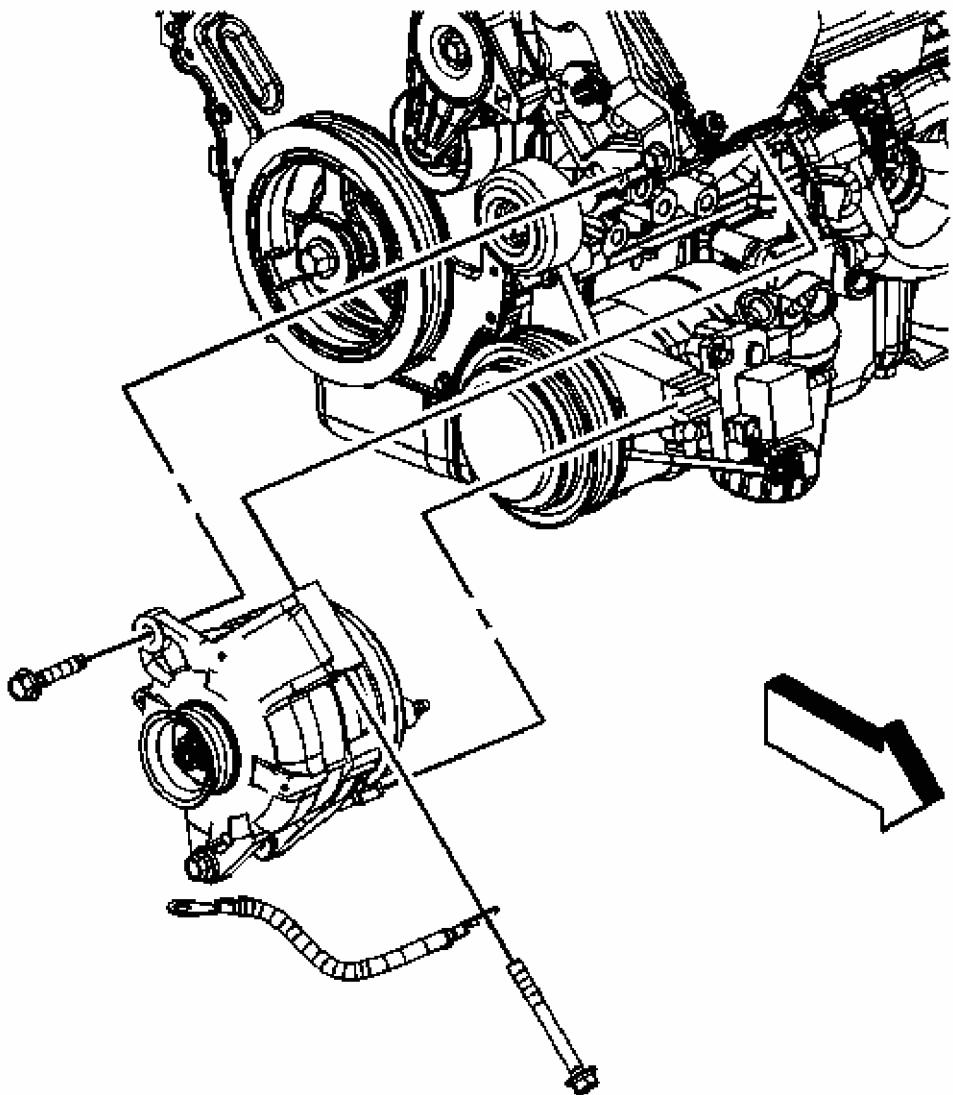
Identifying Rear Generator Bolt & Ground Cable
